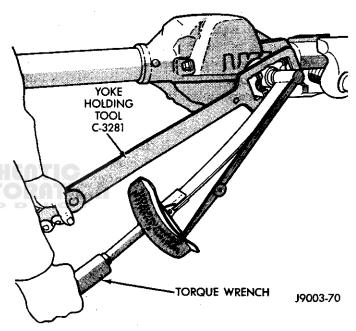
Tightening Drive Pinion Gear Shaft Nut
